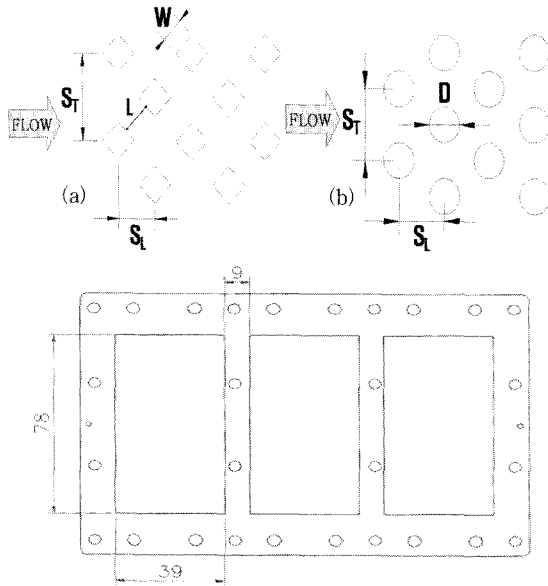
Arrays of heat sinks (upper) and layout of base DCB (bottom); (a) diamond shaped fins, (b) circular one
